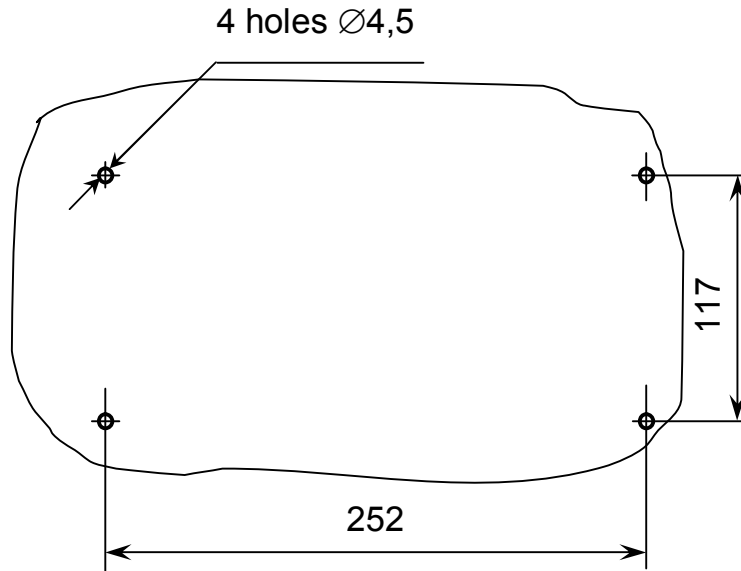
Layout of holes for mounting the panel-type converter unit
